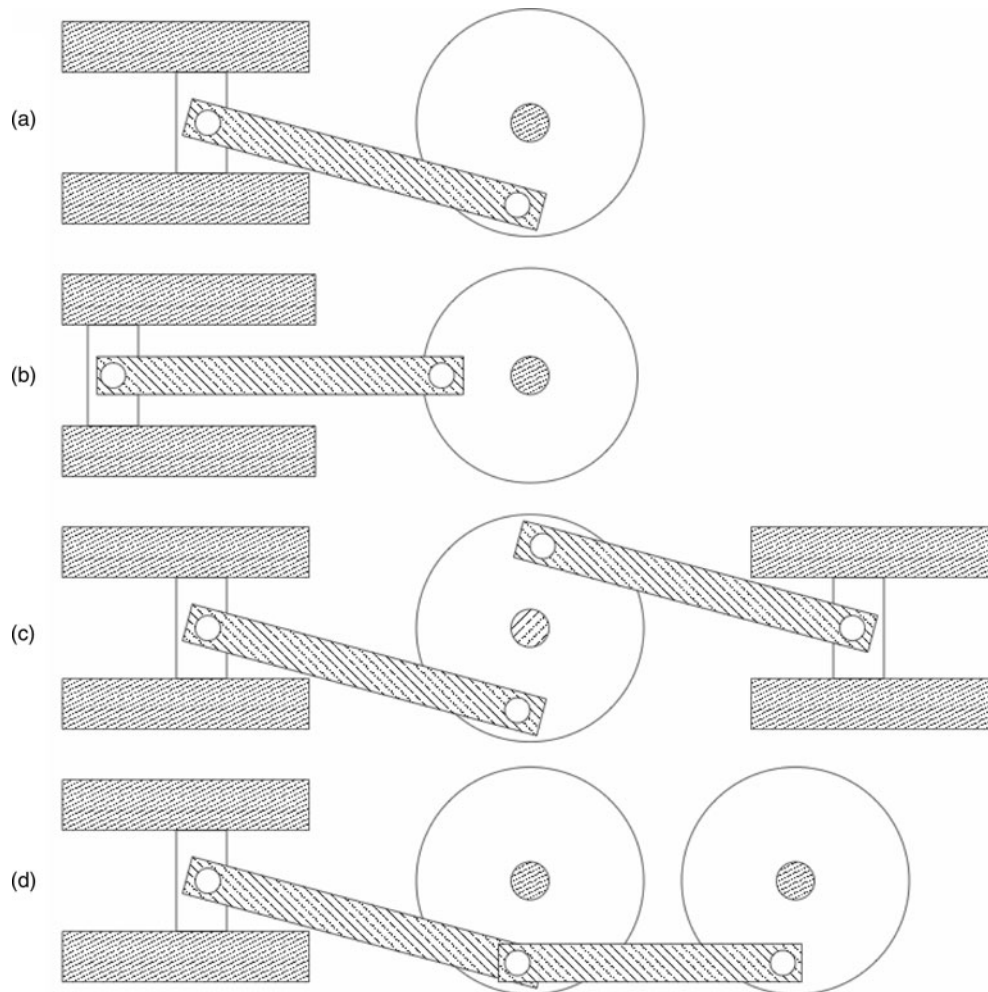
(a) A sample source drawing of a piston and crankshaft assembly, (b) a target drawing of the same device with the piston now at the top of its range of motion, (c) a sample target drawing of a double piston and crankshaft assembly, and (d) a sample target drawing with two crankshafts and a single piston. In all cases the task is to transfer and adapt the model of the device in the first drawing to the target.
